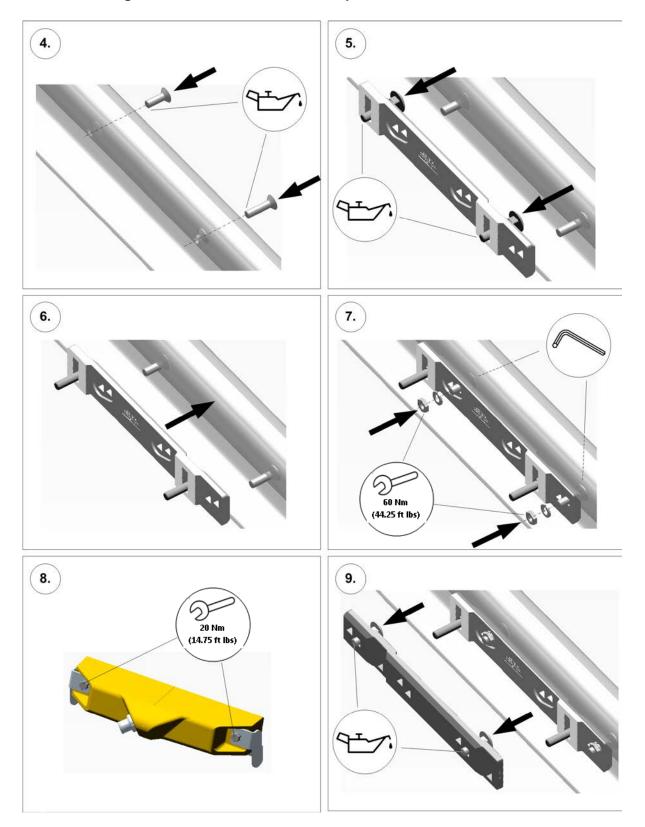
Attaching Bolts on Wheel Detector for Option A3 Mount (Part 1)
